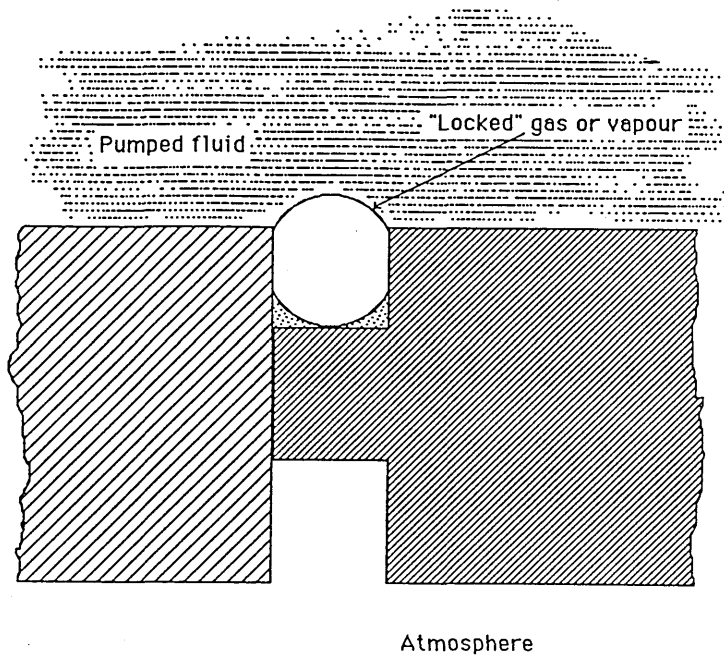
Vapour locking phenomenon in a mechanical seal chamber
